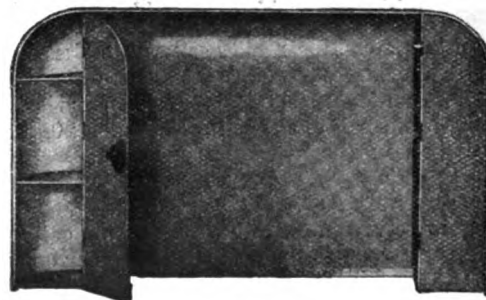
The C.M.F. Sheet Metal Dashboard.
